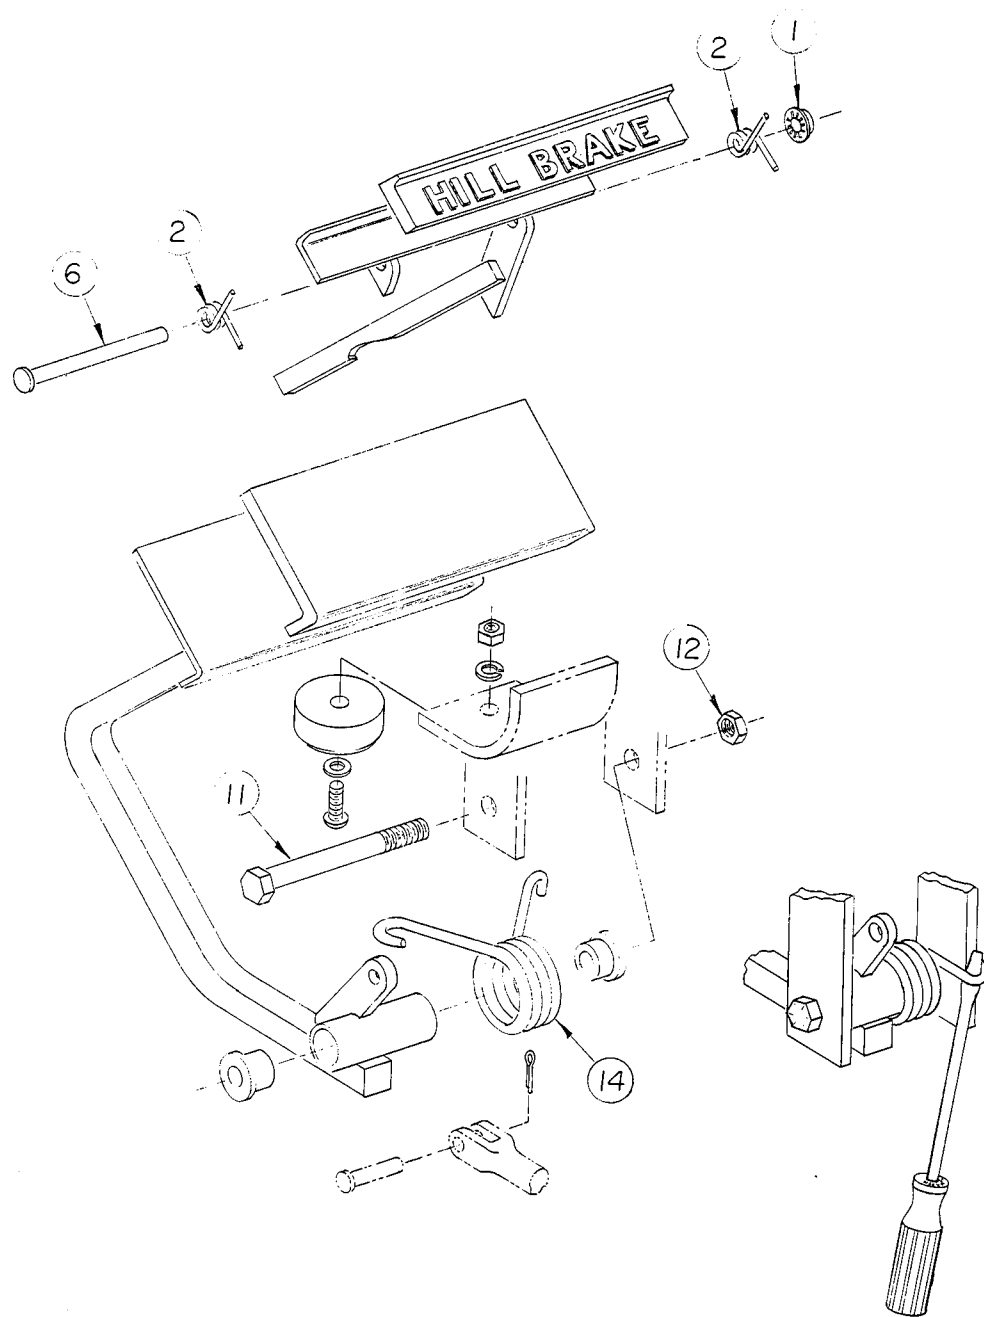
C DISASSEMBLY OF BRAKE PEDAL
